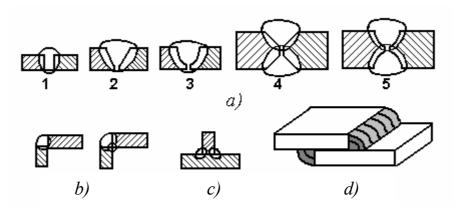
Welding joints: *a)* butt welds (1 – without welding groove, 2 – *single Vee groove*, 3 – *single U groove*, 4 – *double Vee groove*, 5 – *double U groove*); *b)* corner welds; *c)* fillet weld; *d)* lap weld
